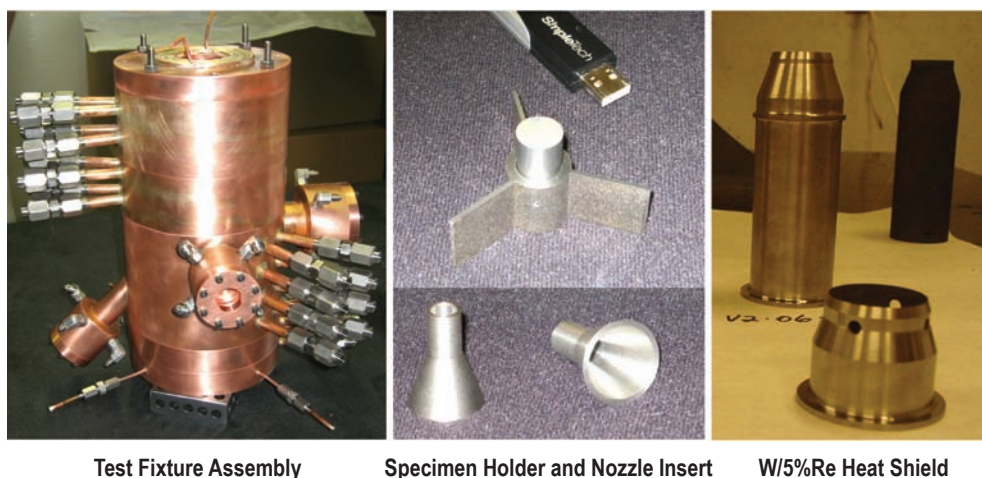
Test fixture hardware for passive hot-hydrogen materials exposure.
